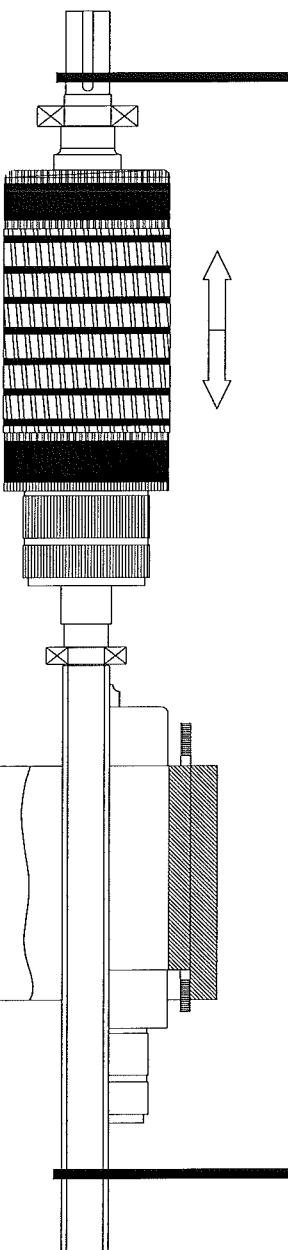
Removing the rotor for motors of medium and large size (suggested for motor H 200 and upwards)
